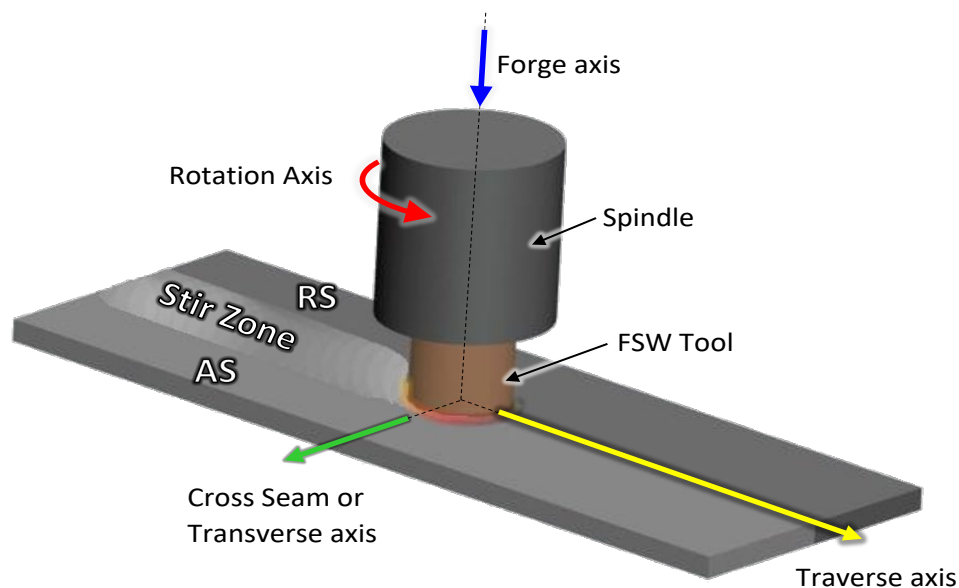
The FSP tool rotates counterclockwise as it traverses along the joint lines between the two plates. Plasticized material is mixed, forming a welded joint behind the tool. The stir zone is the material that has been mixed. The advancing side is the side of the joint where a point on the outer edge of the tool is rotating from the back of the tool to the front. The retreating side of the joint is where a point on the outer edge of the tool is moving from the front to the back. Image provided by (Ross and Alabi 2019).
